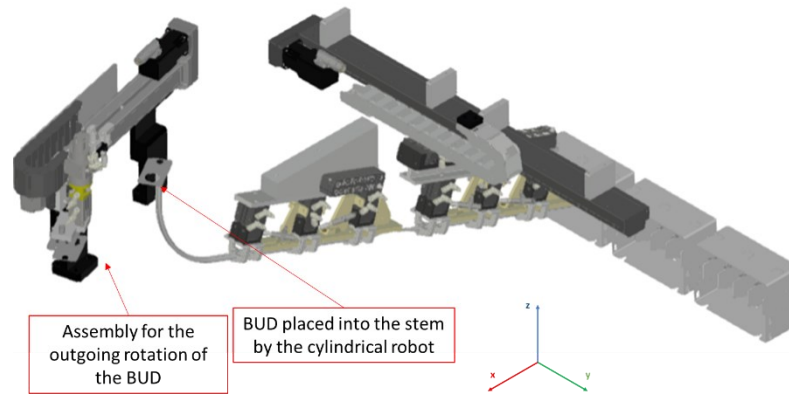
BUD placed onto the stem of the fixed group-Case filling by the cylindrical robot
